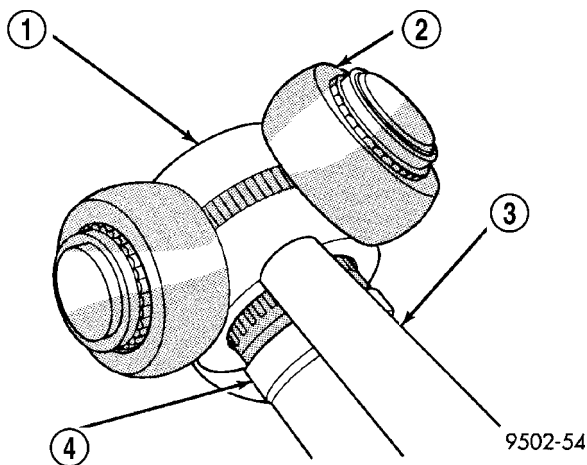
Spider Assembly Removal from Interconnecting Shaft
